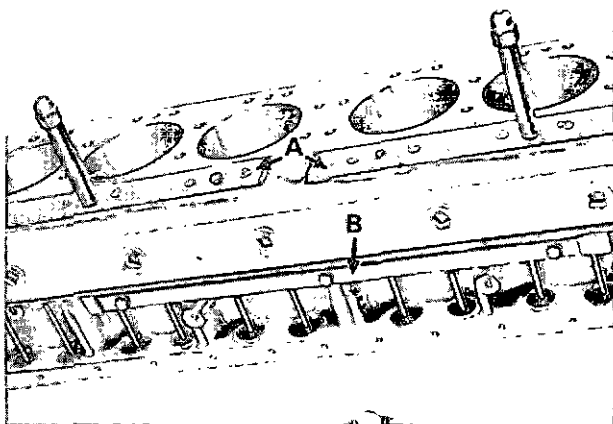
Cam follower retainers (A) and oil gallery (B) T720040
